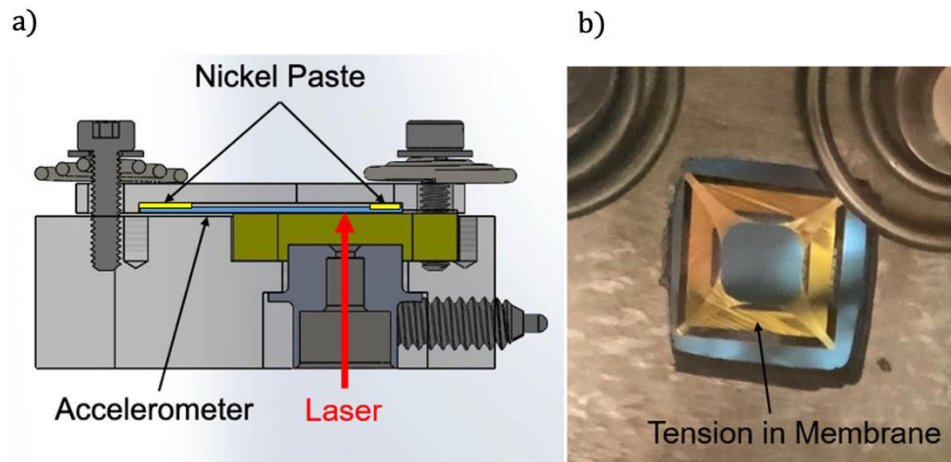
Spring loaded mount for portable vacuum chamber. (a) Solidworks Schematic. (b) Mounted Accelerometer.
